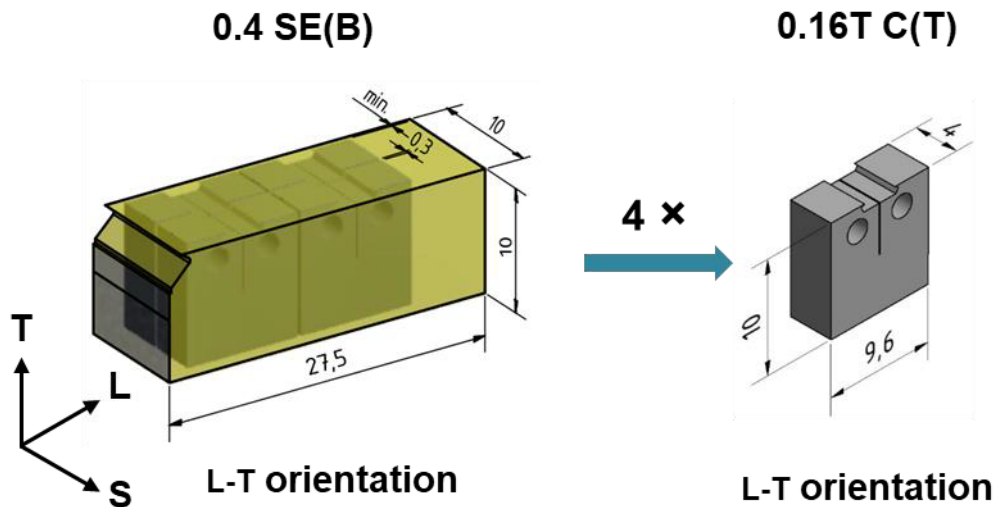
Cutting scheme of 0.16T C(T) specimens manufactured from a standard Charpy-sized SE(B) specimen
